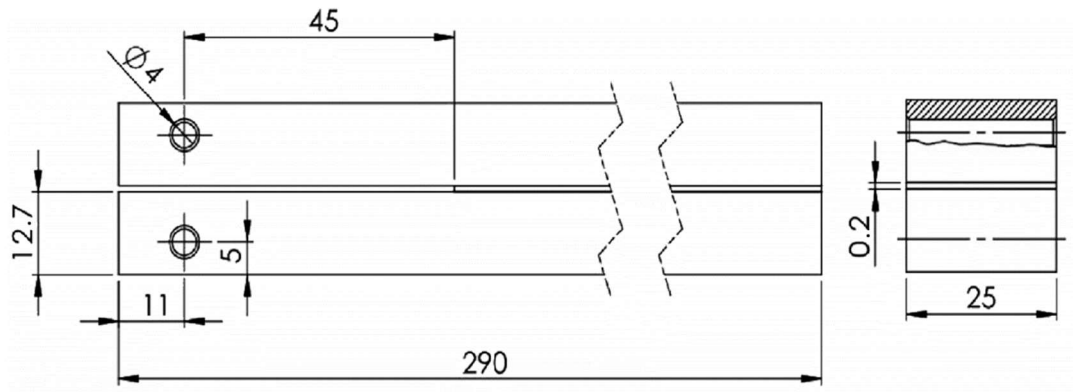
Specimens geometry according to ASTM D-3433-99 (dimensions in millimeters)
